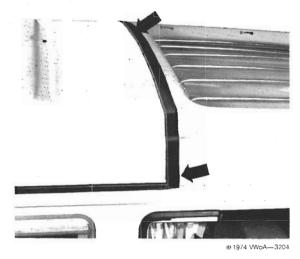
Points where seal contact should be checked (arrows). Check on opposite side also.
